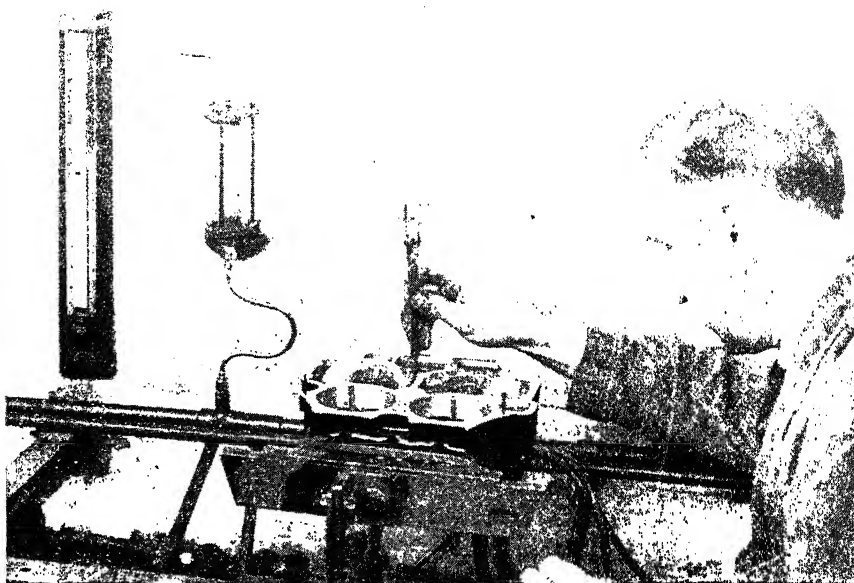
CHECKING FUEL LEVEL DURING MANUFACTURE.
